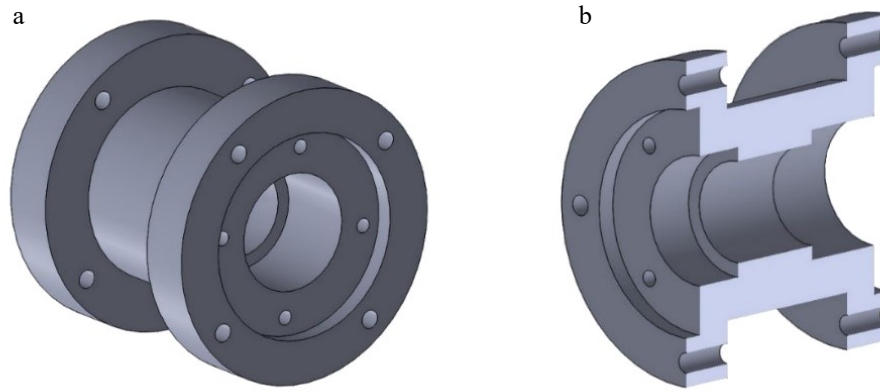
(a) Full CAD Model of Spindle Housing Design (b) The 3D Sectional View of the Spindle Housing Design
